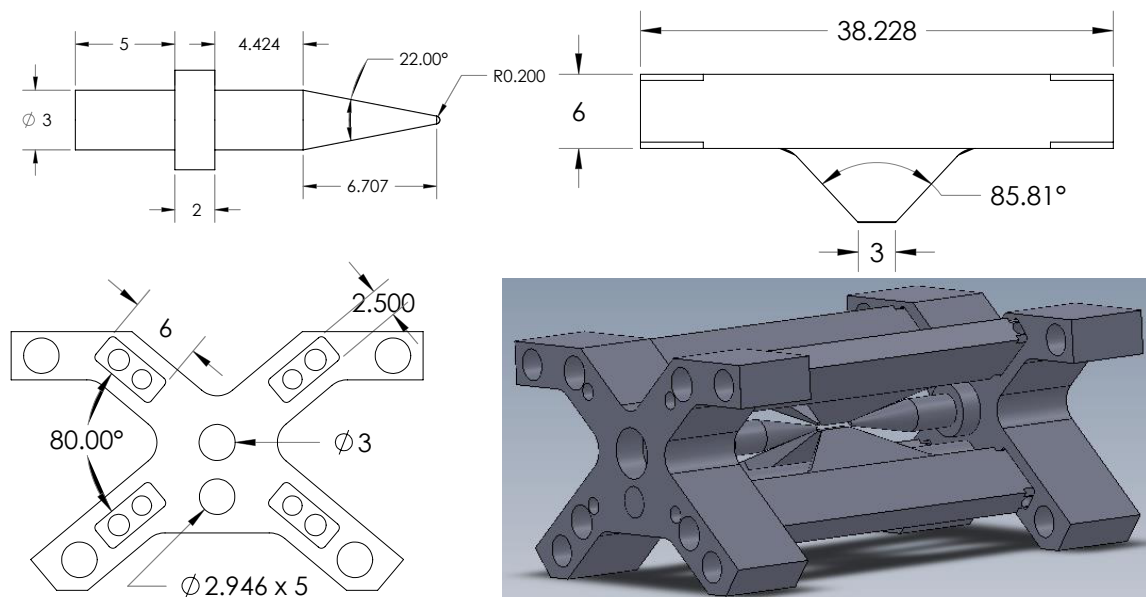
Solidworks drafting of the X-trap. Top left shows an endcap electrode, top right a blade electrode, bottom left the insulating spacer, and bottom right a 3D rendering of the trap assembly. All length dimensions are in millimeters. The blade and spacer drawings are to scale with each other and the endcap drawing is expanded by a factor of 1.75 with respect to that scale. The “extra” holes in the spacer are used to mount electrodes dedicated to compensation of micromotion and for attaching the trap assembly to groove grabbers for vacuum chamber mounting. Upon assembly, the separation between the endcaps is 3.6 mm and the separation between opposite blades is 0.8 mm.
